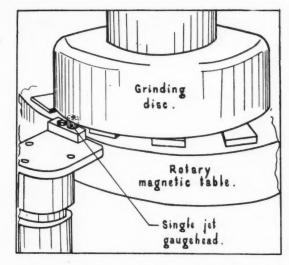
Arrangement of measuring unit designed to control position of segmental-type grinding wheel on large surface grinder.
